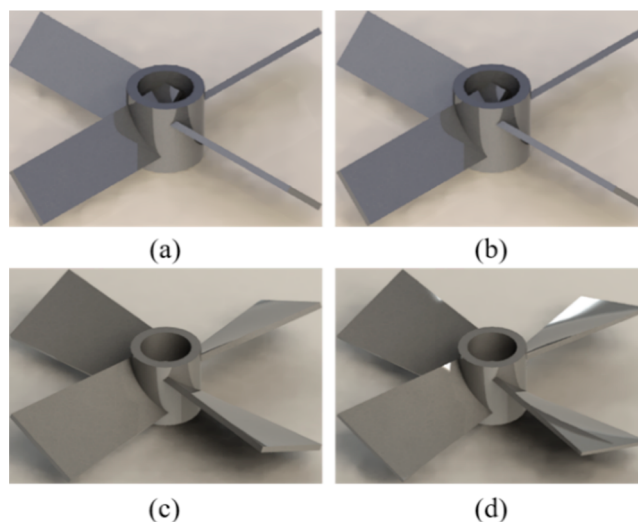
3D-printed model of impeller before and after optimization: (a) original upper impeller, (b) optimized upper impeller, (c) original lower impeller, and (d) optimized lower impeller.
